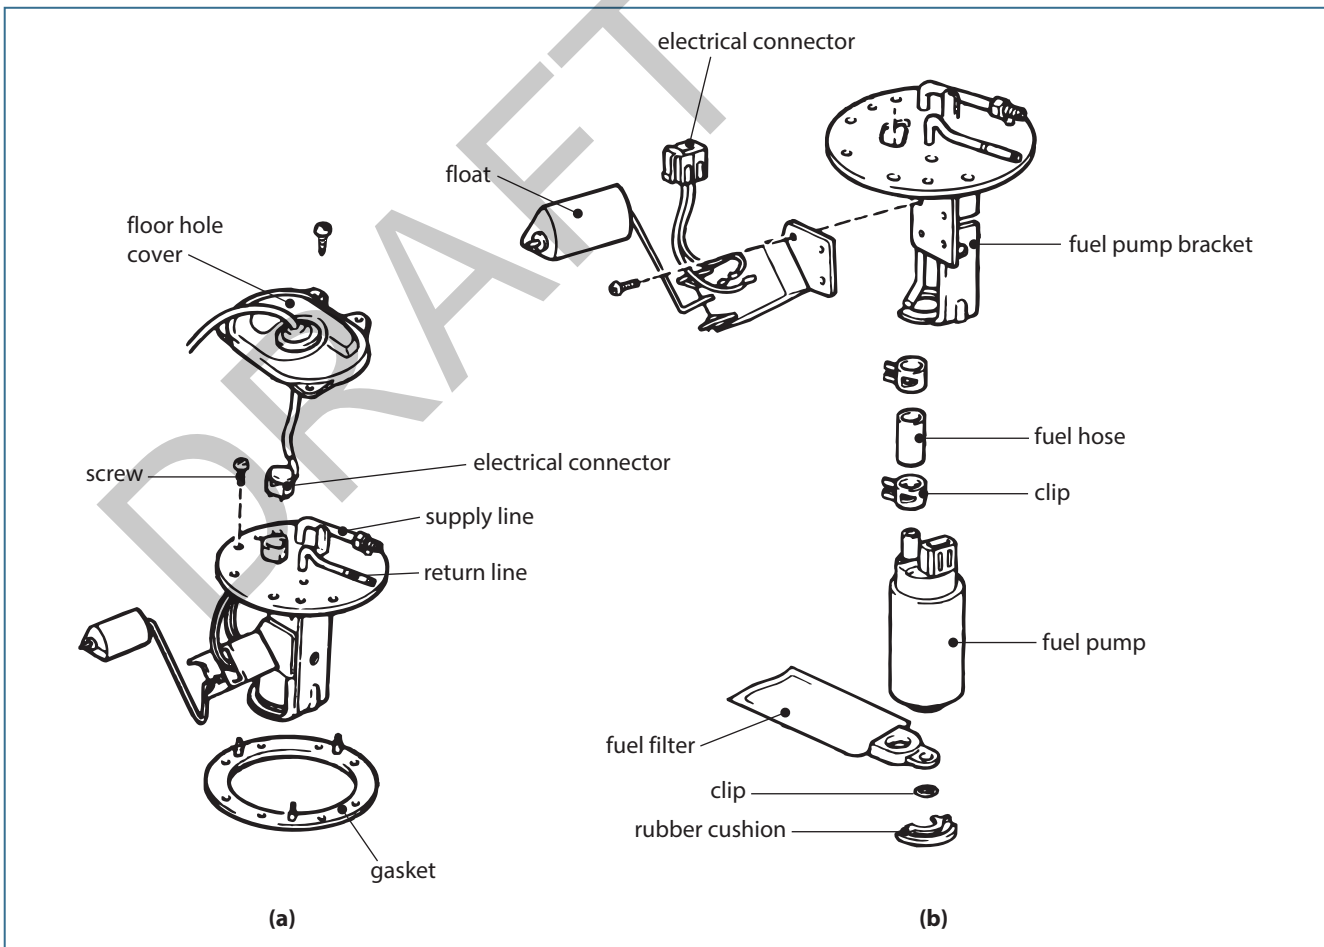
Submersible fuel pump and sender unit assembly (a) assembled (b) dismantled TOYOTA
